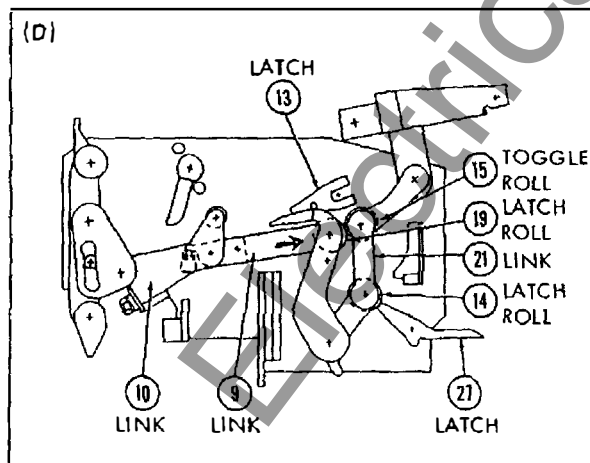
Fig. D - Start of Closing. To close the breaker, the spring release latch (13) is moved up to release latch roll (19). Links (9, 10) drive forward as a unit. Latch roll (19) forces toggle roll (15) forward. This rotates link (21) about latch roll (14) which is held fixed by latch (27).
